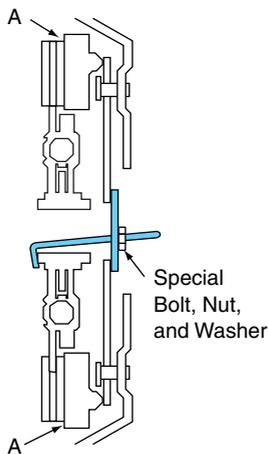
A simple, shop-made tool can be used to hold the disc centered against the pressure plate as the pressure plate is installed. The gaps at the edge of the disc and pressure plate (A) should be equal.
